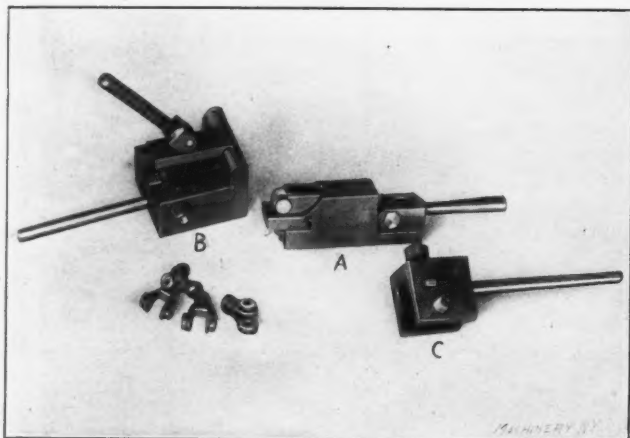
Jigs for Drilling and Milling the Rocker Arm Clevis
